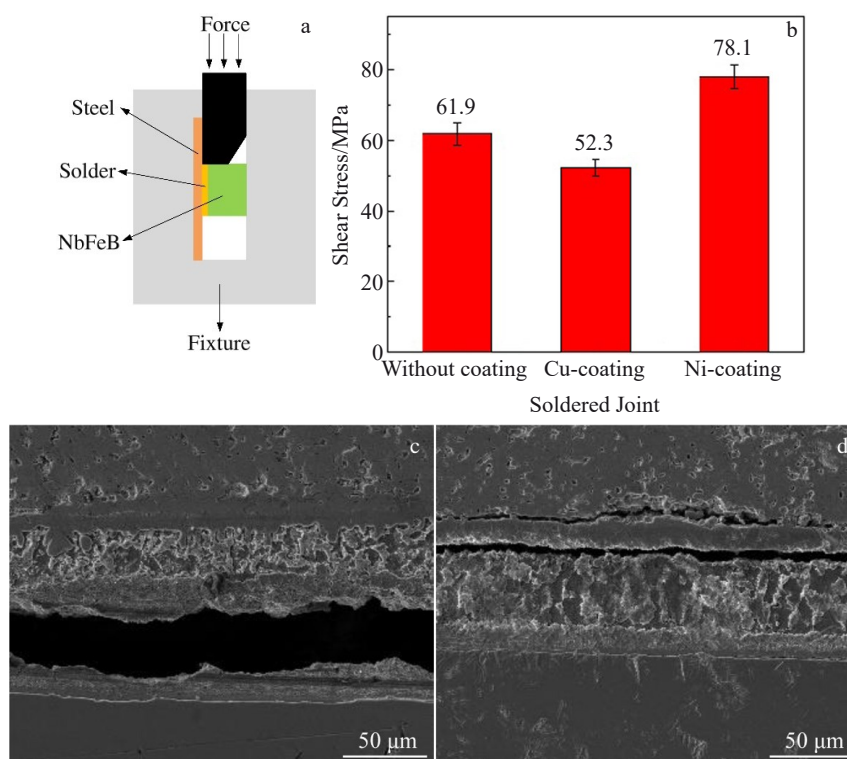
Schematic diagram of shear test (a); shear properties of different soldered joints (b); fracture morphologies of soldered joints of Cu-coated (c) and Ni-coated (d) NdFeB magnet with steel
